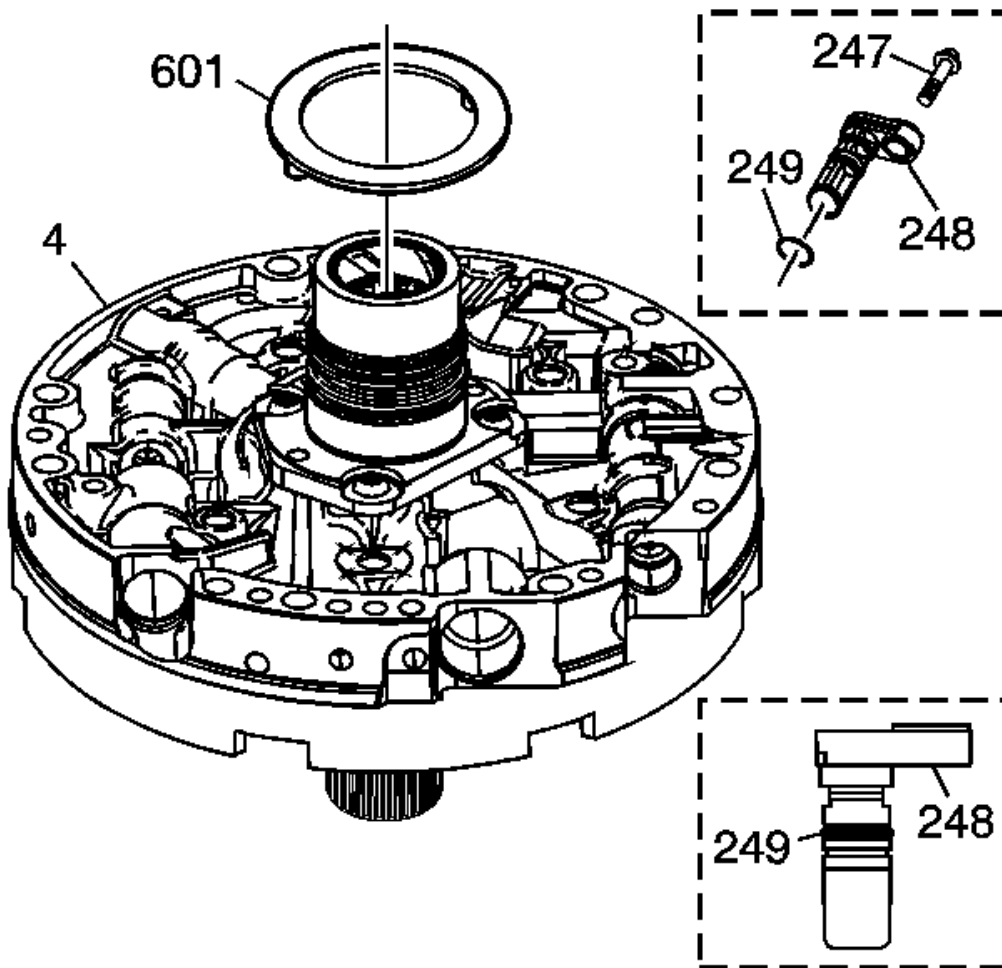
Inspecting Center Support Assembly For Damage Or Wear
